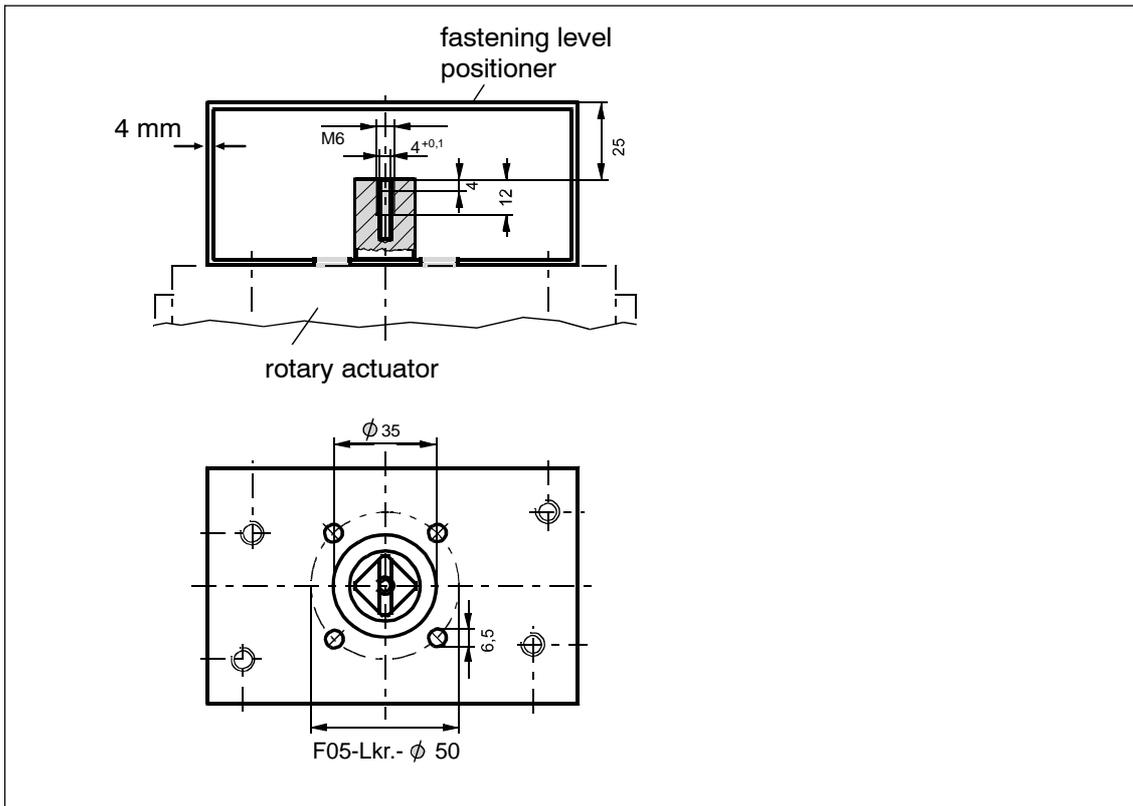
Attachment of rotary actuator, mounting console (scope of delivery actuator manufacturer), dimensions
